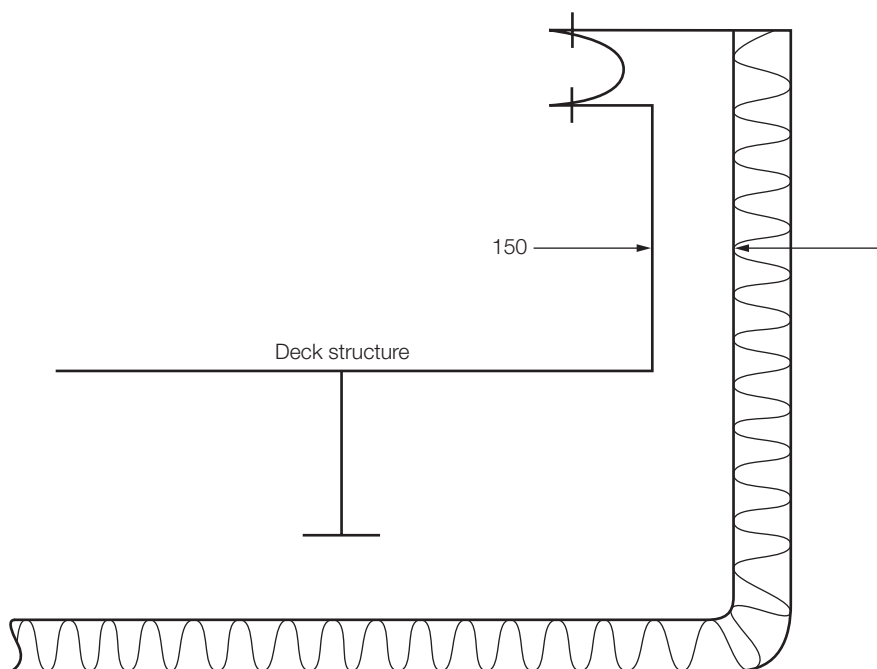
Minimum distance between cargo tank dome and deck structure
